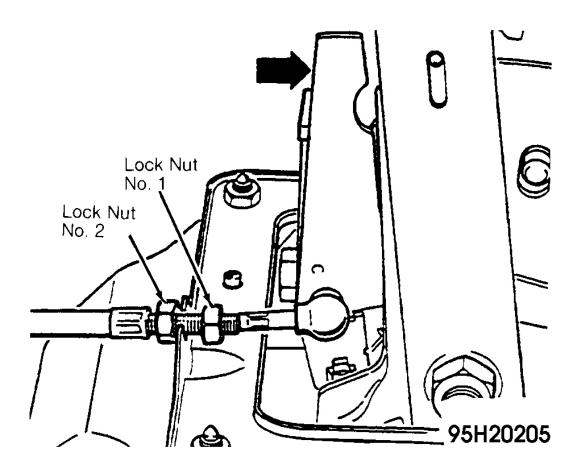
Adjusting Shift Lock Cable Courtesy of VOLKSWAGEN UNITED STATES, INC.
